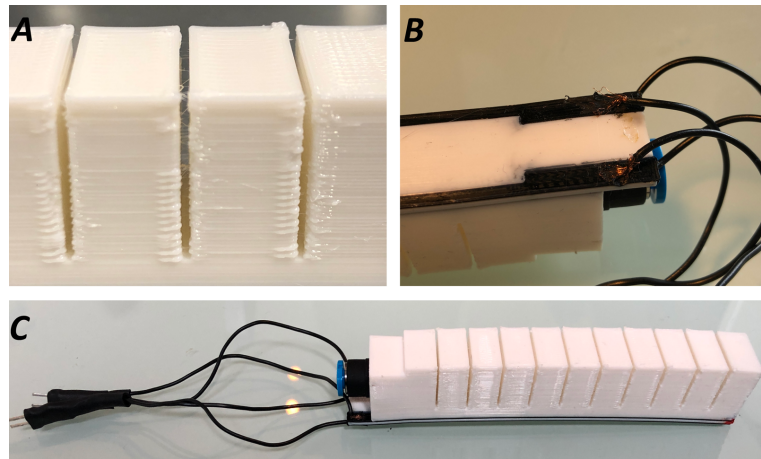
A. After printing stringing is present between the chambers. B. Detailed view of the wires melted into the mounting pads of the sensors. C. Actuator after post processing, including connector for the tube and wires connected to the mounting pads for the sensor readout.
